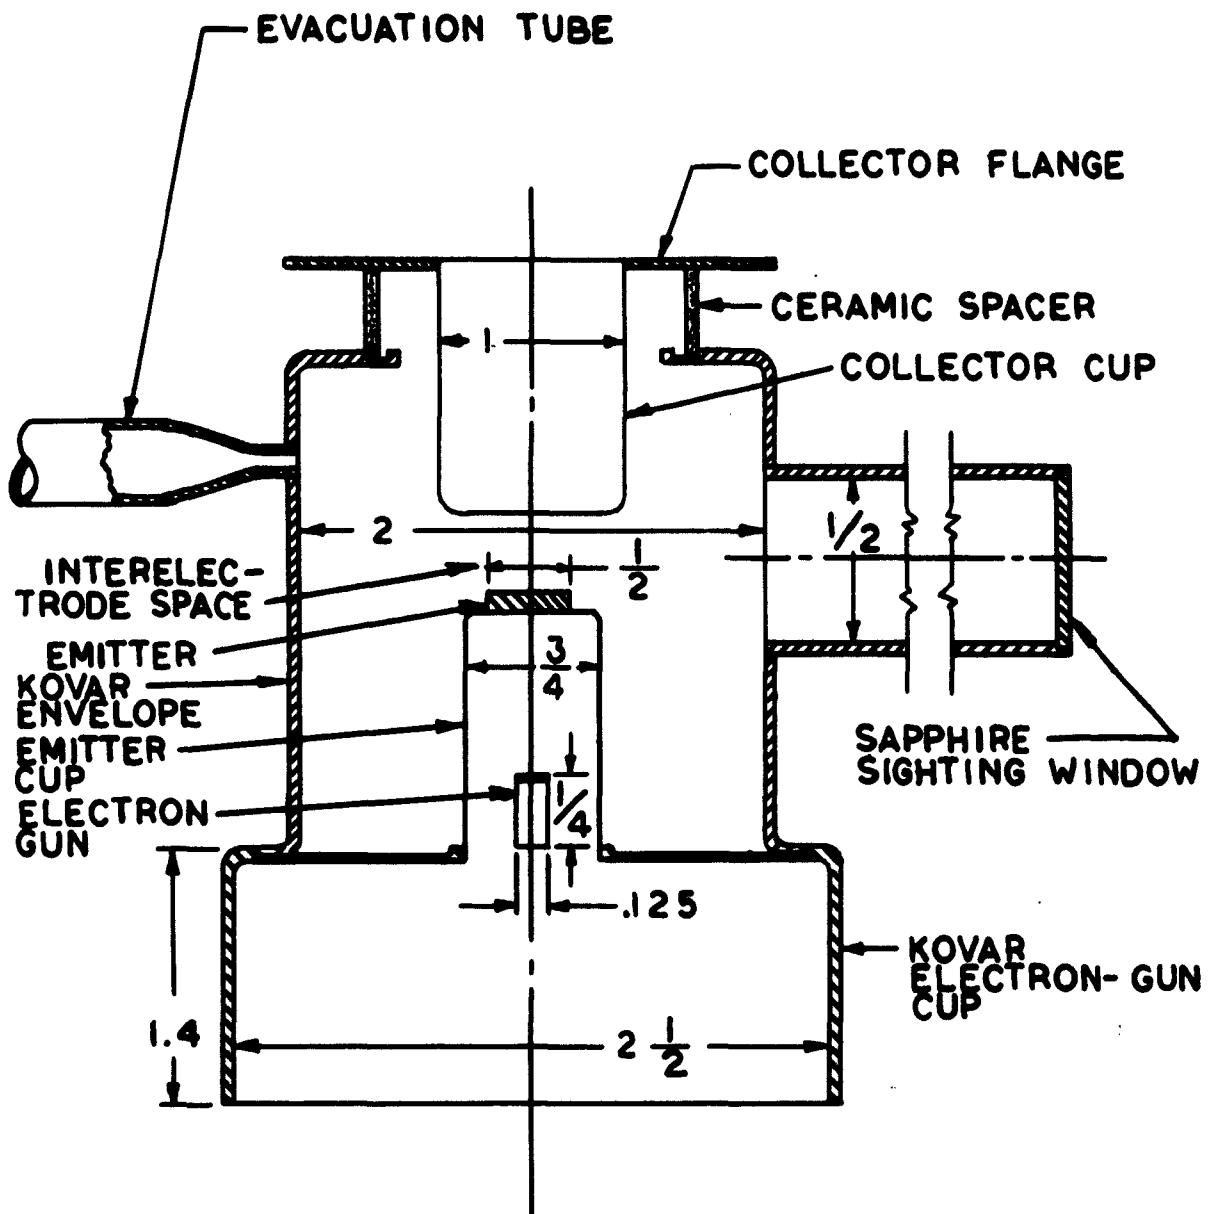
OPPOSED CUP METAL-CERAMIC GEOMETRY
